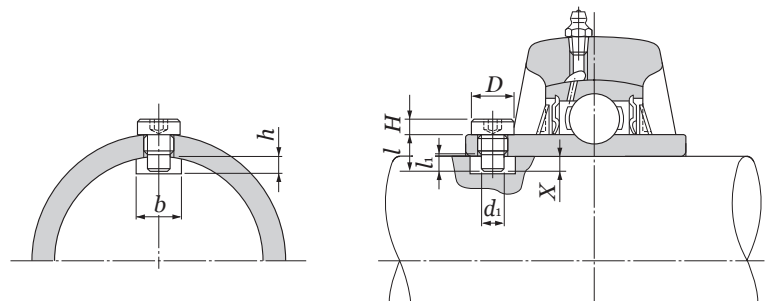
Dimensional tolerances for the shaft eccentric collar system bearing units
